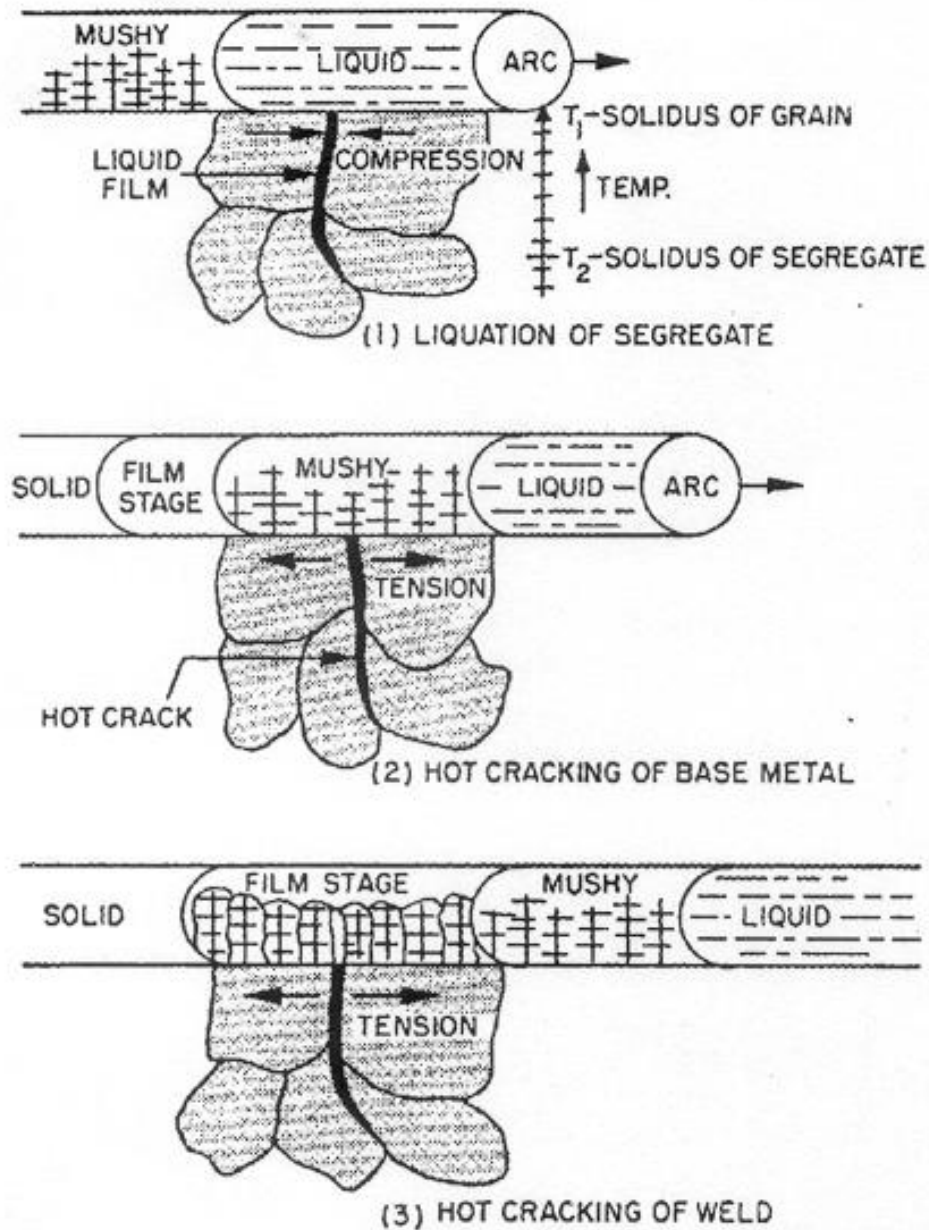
Schematic illustration of weld hot cracking process: a) liquation of segregates, b) hot cracking of base metal, c) hot cracking of weld [61]
